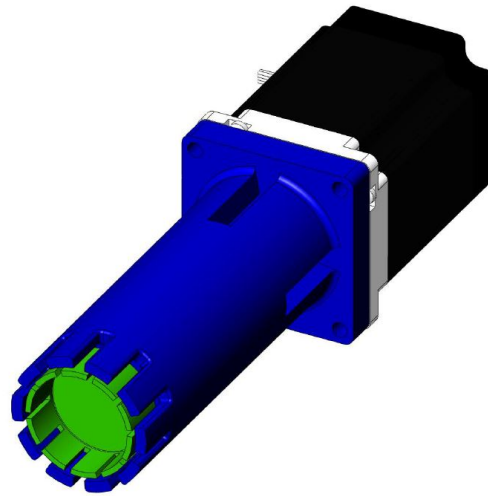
3D printed high shear mixing attachment with stepper motor
